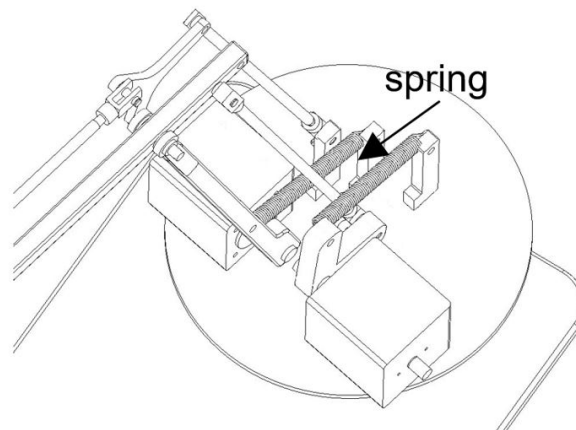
Static balancing setup to hold the device steady in any position when not in use.
